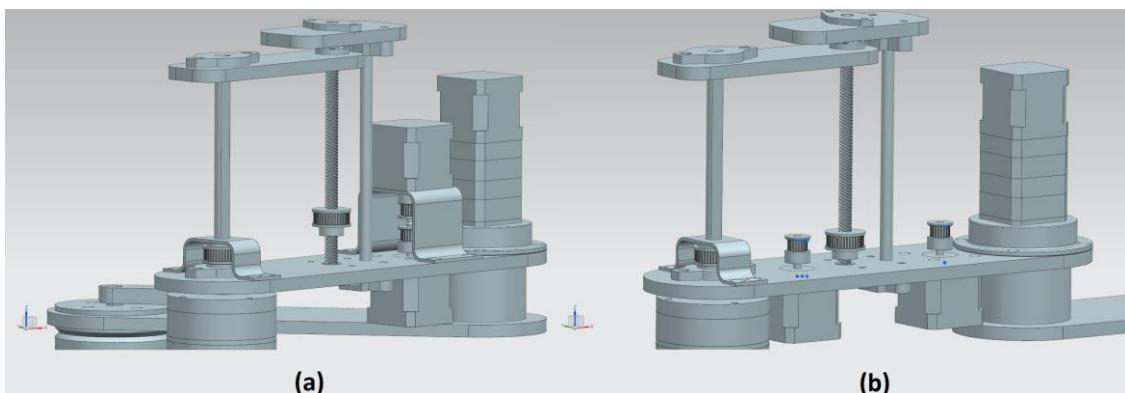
CAD Assembly Models of (a) The Stacked Stepper Motor Approach and (b) The Z-Axis Bias Approach
